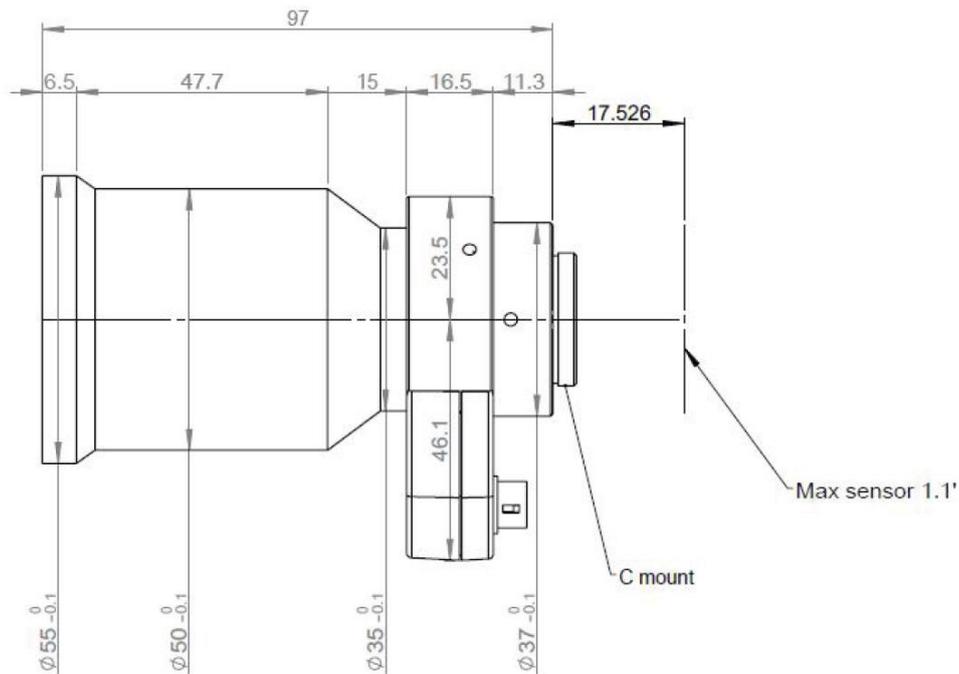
Mechanical drawing of the ELM-16-4.8-18-C
